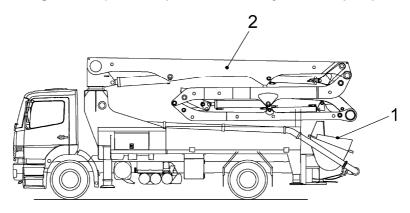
b) — Example of a mobile concrete pump with placing boom
